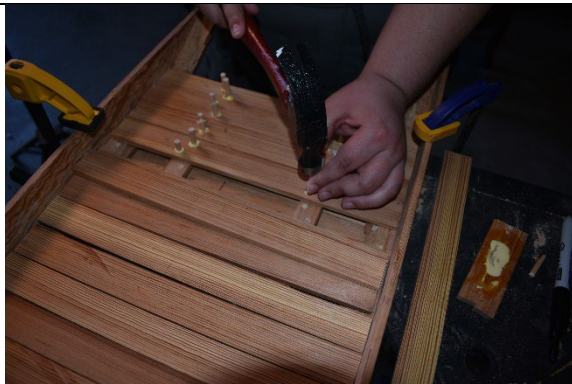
Saldivar hammering treenails into interior planking and stringers (Photo by Michaela Hoots).
